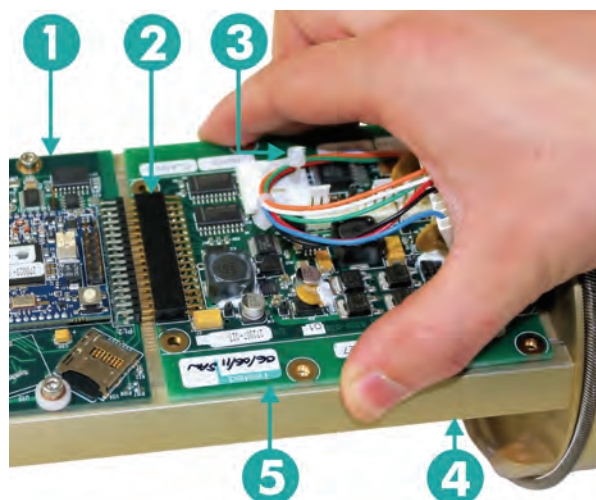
Disconnecting the Ribbon Cable from the Interface PCB Assembly
